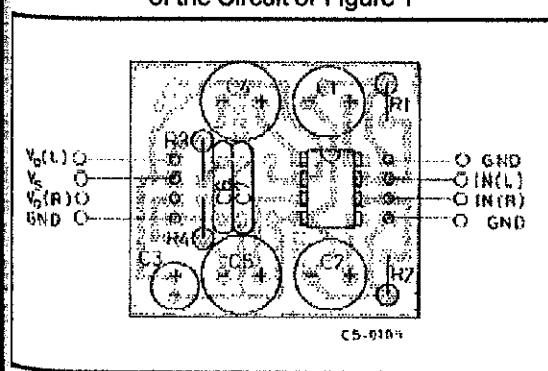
P.C. Board and Components Layout of the Circuit of Figure 2
